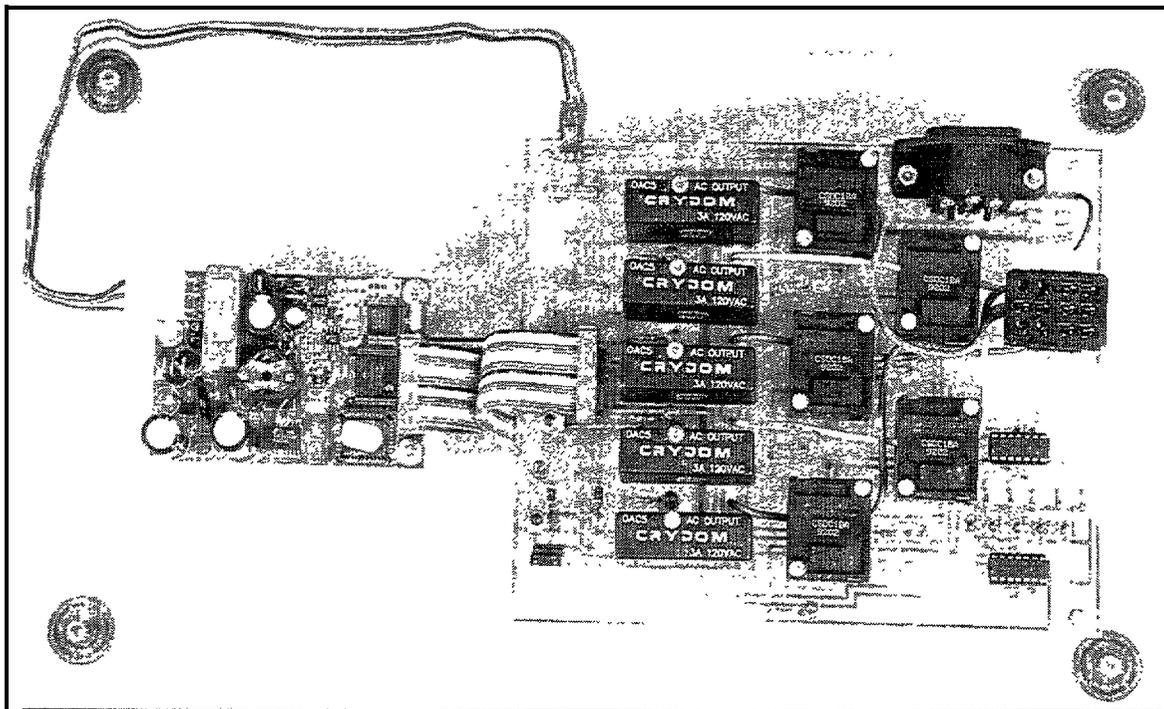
Signal head control module before circuit board layout size was reduced.
